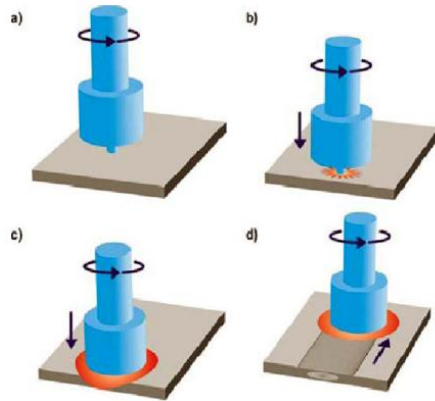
Friction Stir Processing: (a) Rotational Tool (b) Inserting Tool into Surface (c) Pushing to Desired Depth (d) Traverse of Tool
